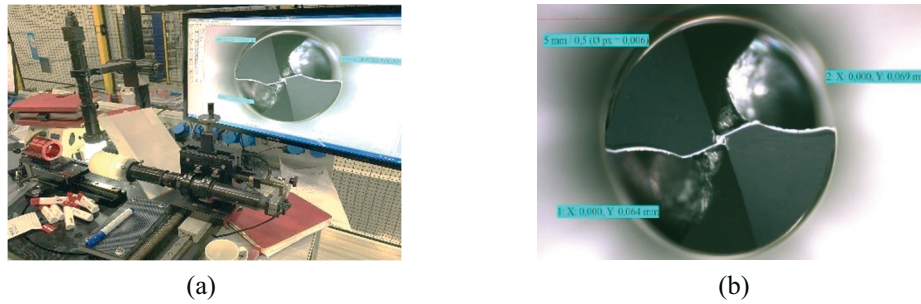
(a) Tool wear measuring instrument; (b) Sample image of tool wear
